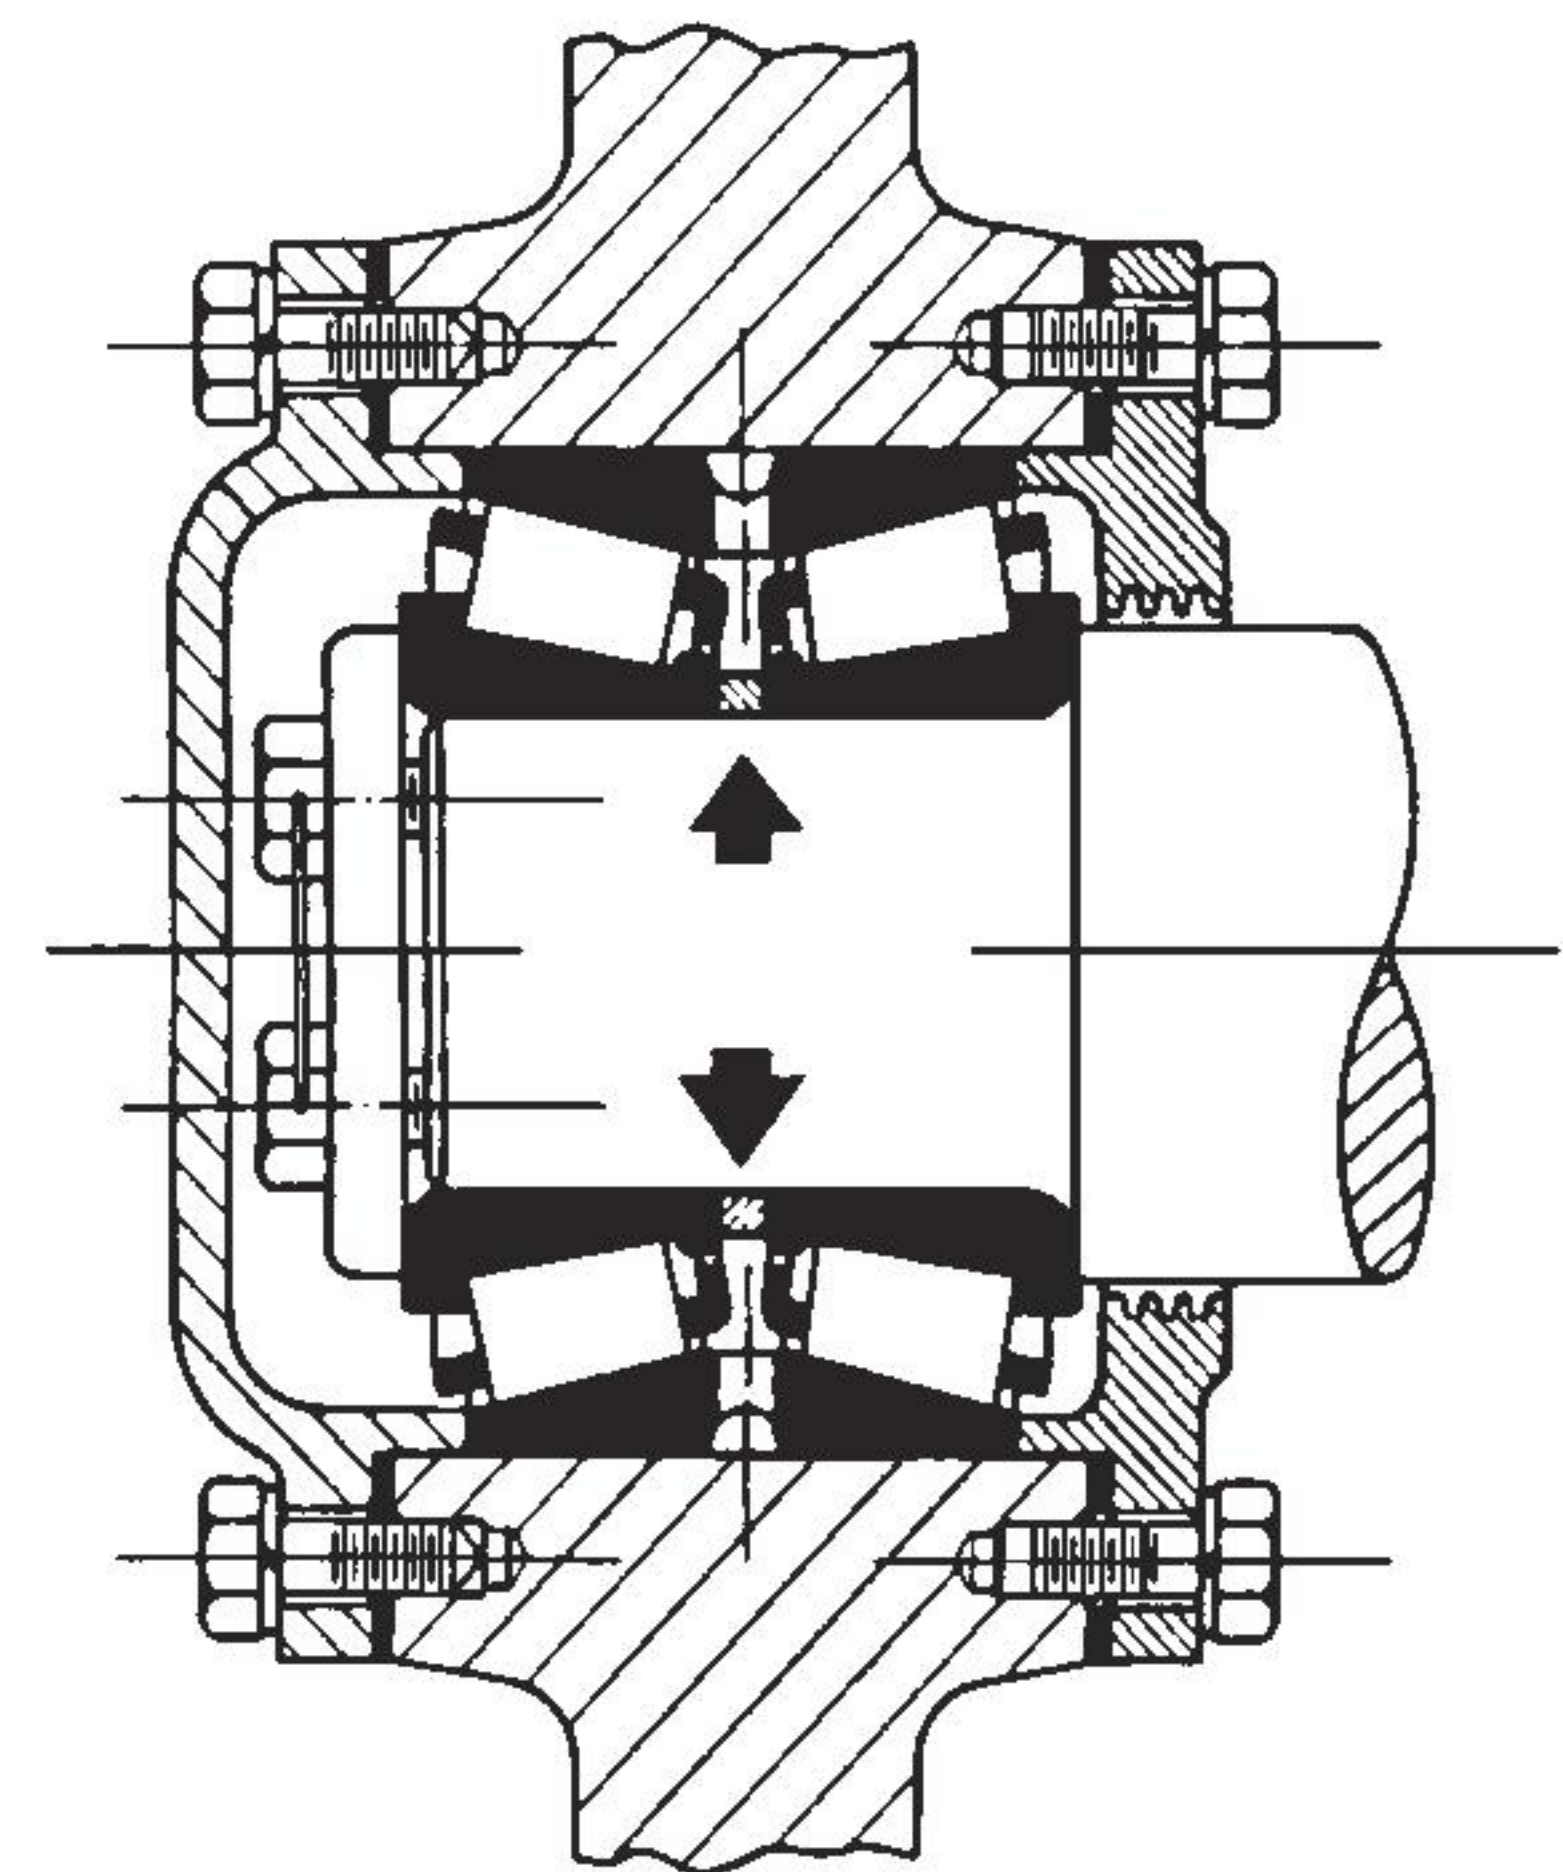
Bearing mounting with a clamp plate locking device using an inner ring adjustment spacer.
